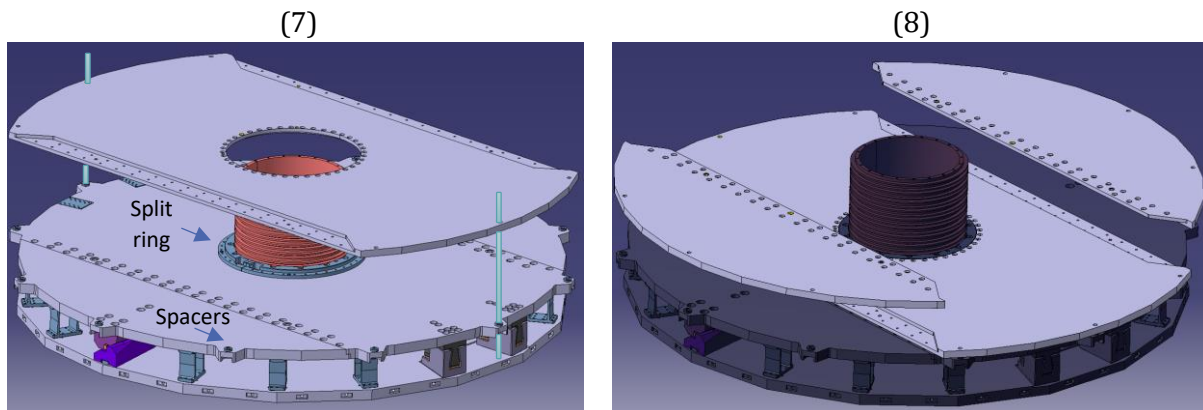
Assembly of stainless steel absorber disks. Steps 7 and 8
